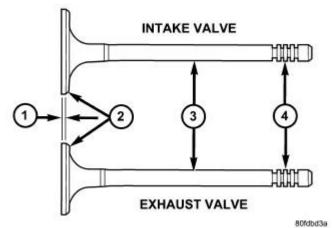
Intake and Exhaust Valves Courtesy of CHRYSLER LLC
